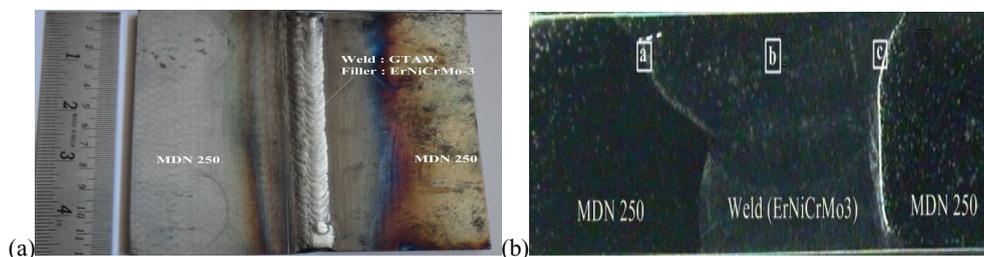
Images of (a) As-welded sample. (b) Macrostructure of weld cross section.
